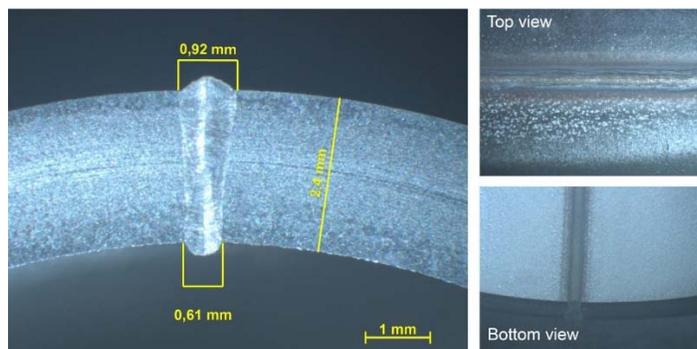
Cross section, top view and bottom view of a profile weld in stainless steel.
